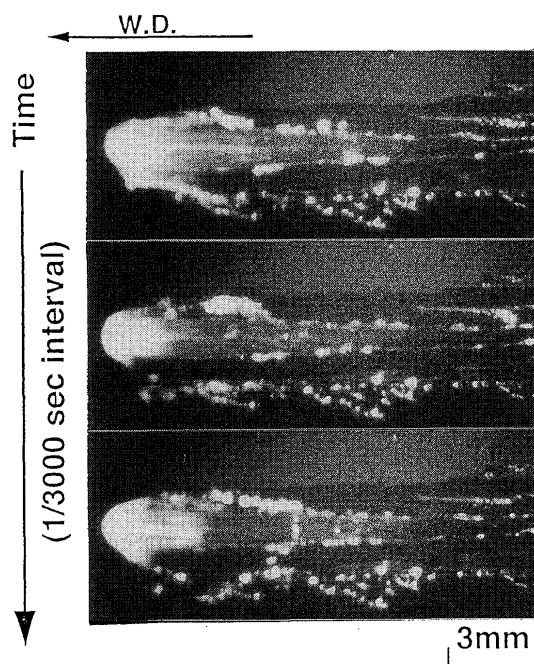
High speed photographs at a welding speed of 0.35m/sec.
